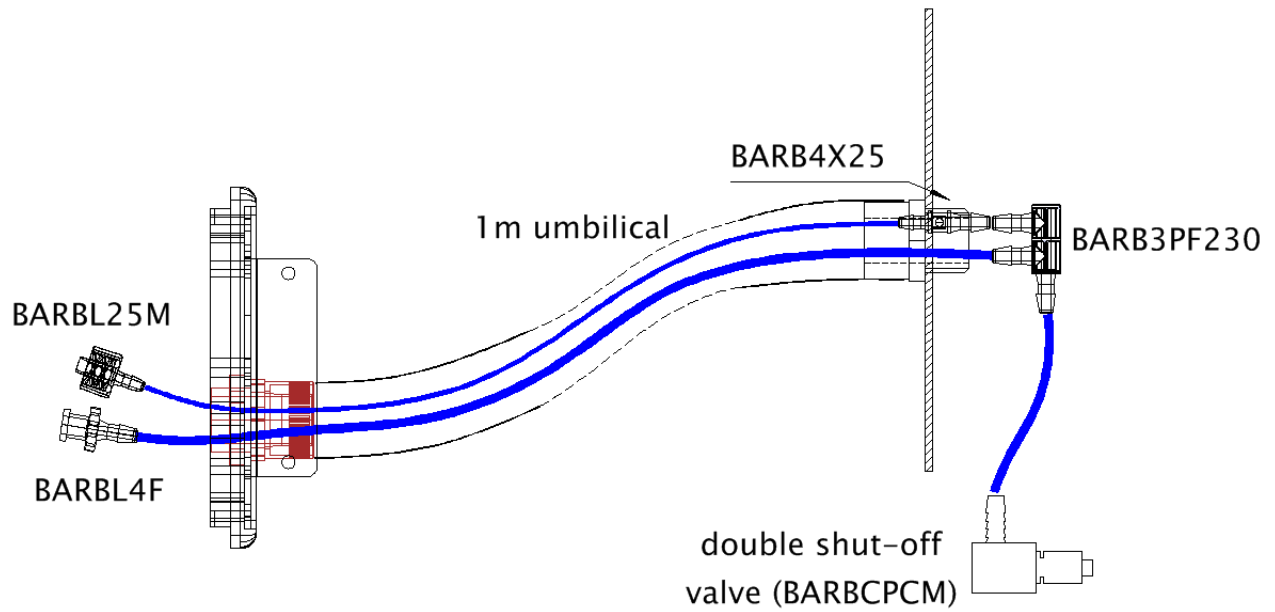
TZ54 and TZ72 Umbilical tubes and fittings
